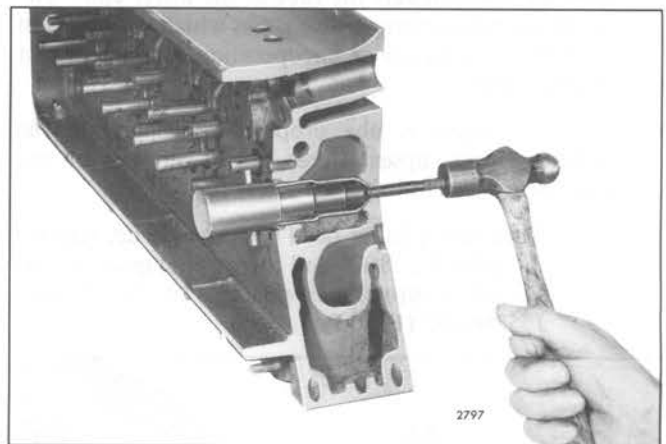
Removing Injector Tube with Tools J 5286-4C and J 5286-5
